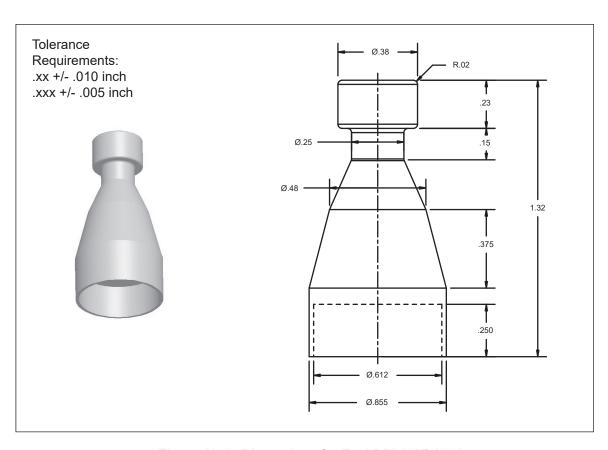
Dimensions for Tool P/N 101F-0001 Seal Guide
